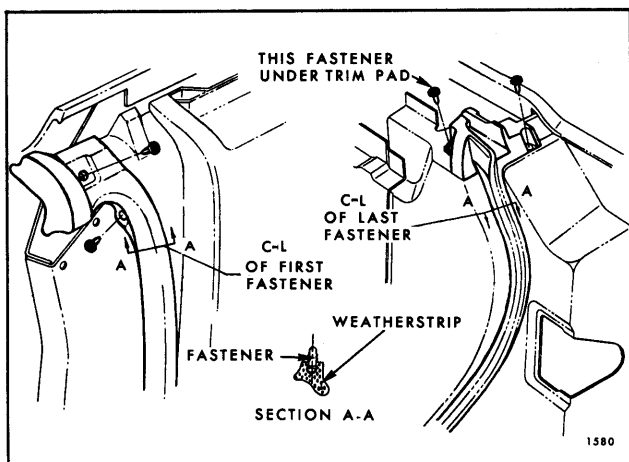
Door Weatherstrip - Attachment Under Trim Assemblies
